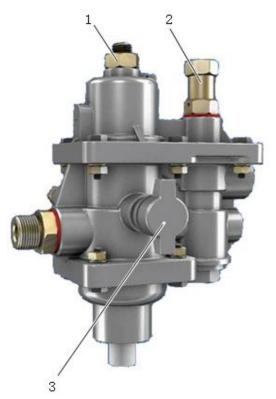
1 Pressure regulating screw 2 Safety valve assembly
